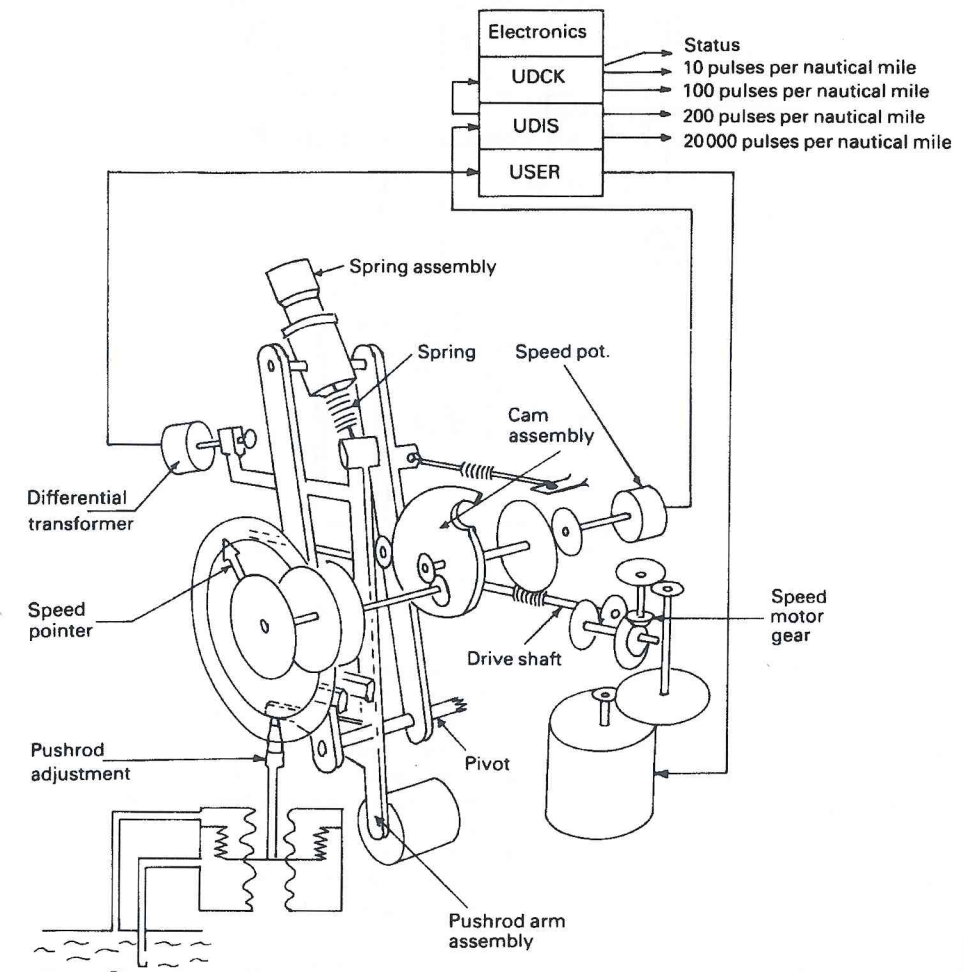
The mechanical speed translating system of the SAL 24 pressure tube log. (Reproduced courtesy of SAL Jungner Marine.)
